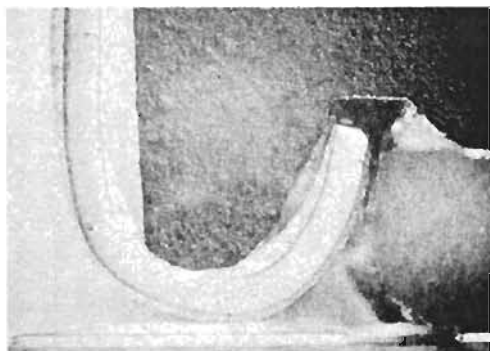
Showing how solder wicks up a J-leaded component terminal (Texas Instruments)
